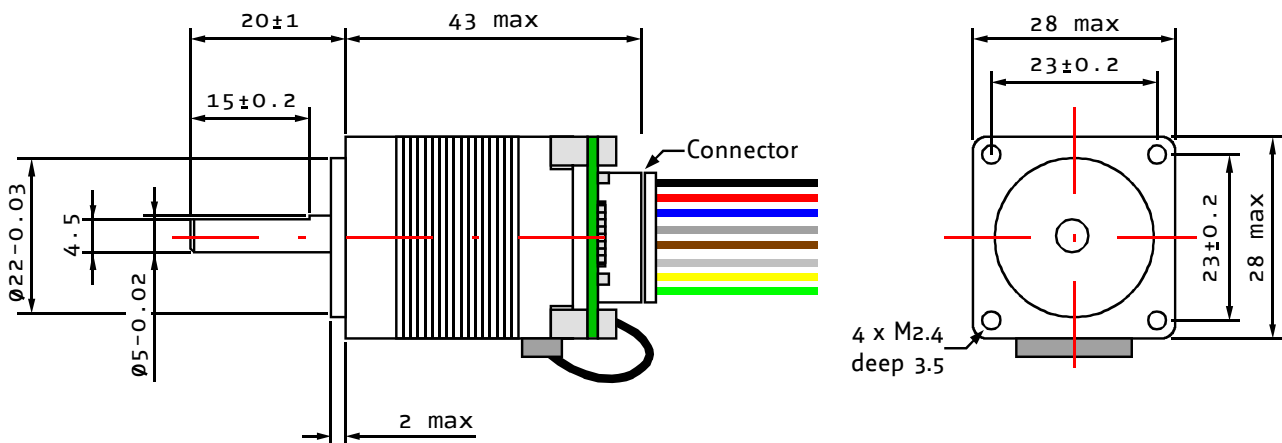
PD1-108-28-SE with 2-phase 28mm stepper motor QSH2818-32-07-006
